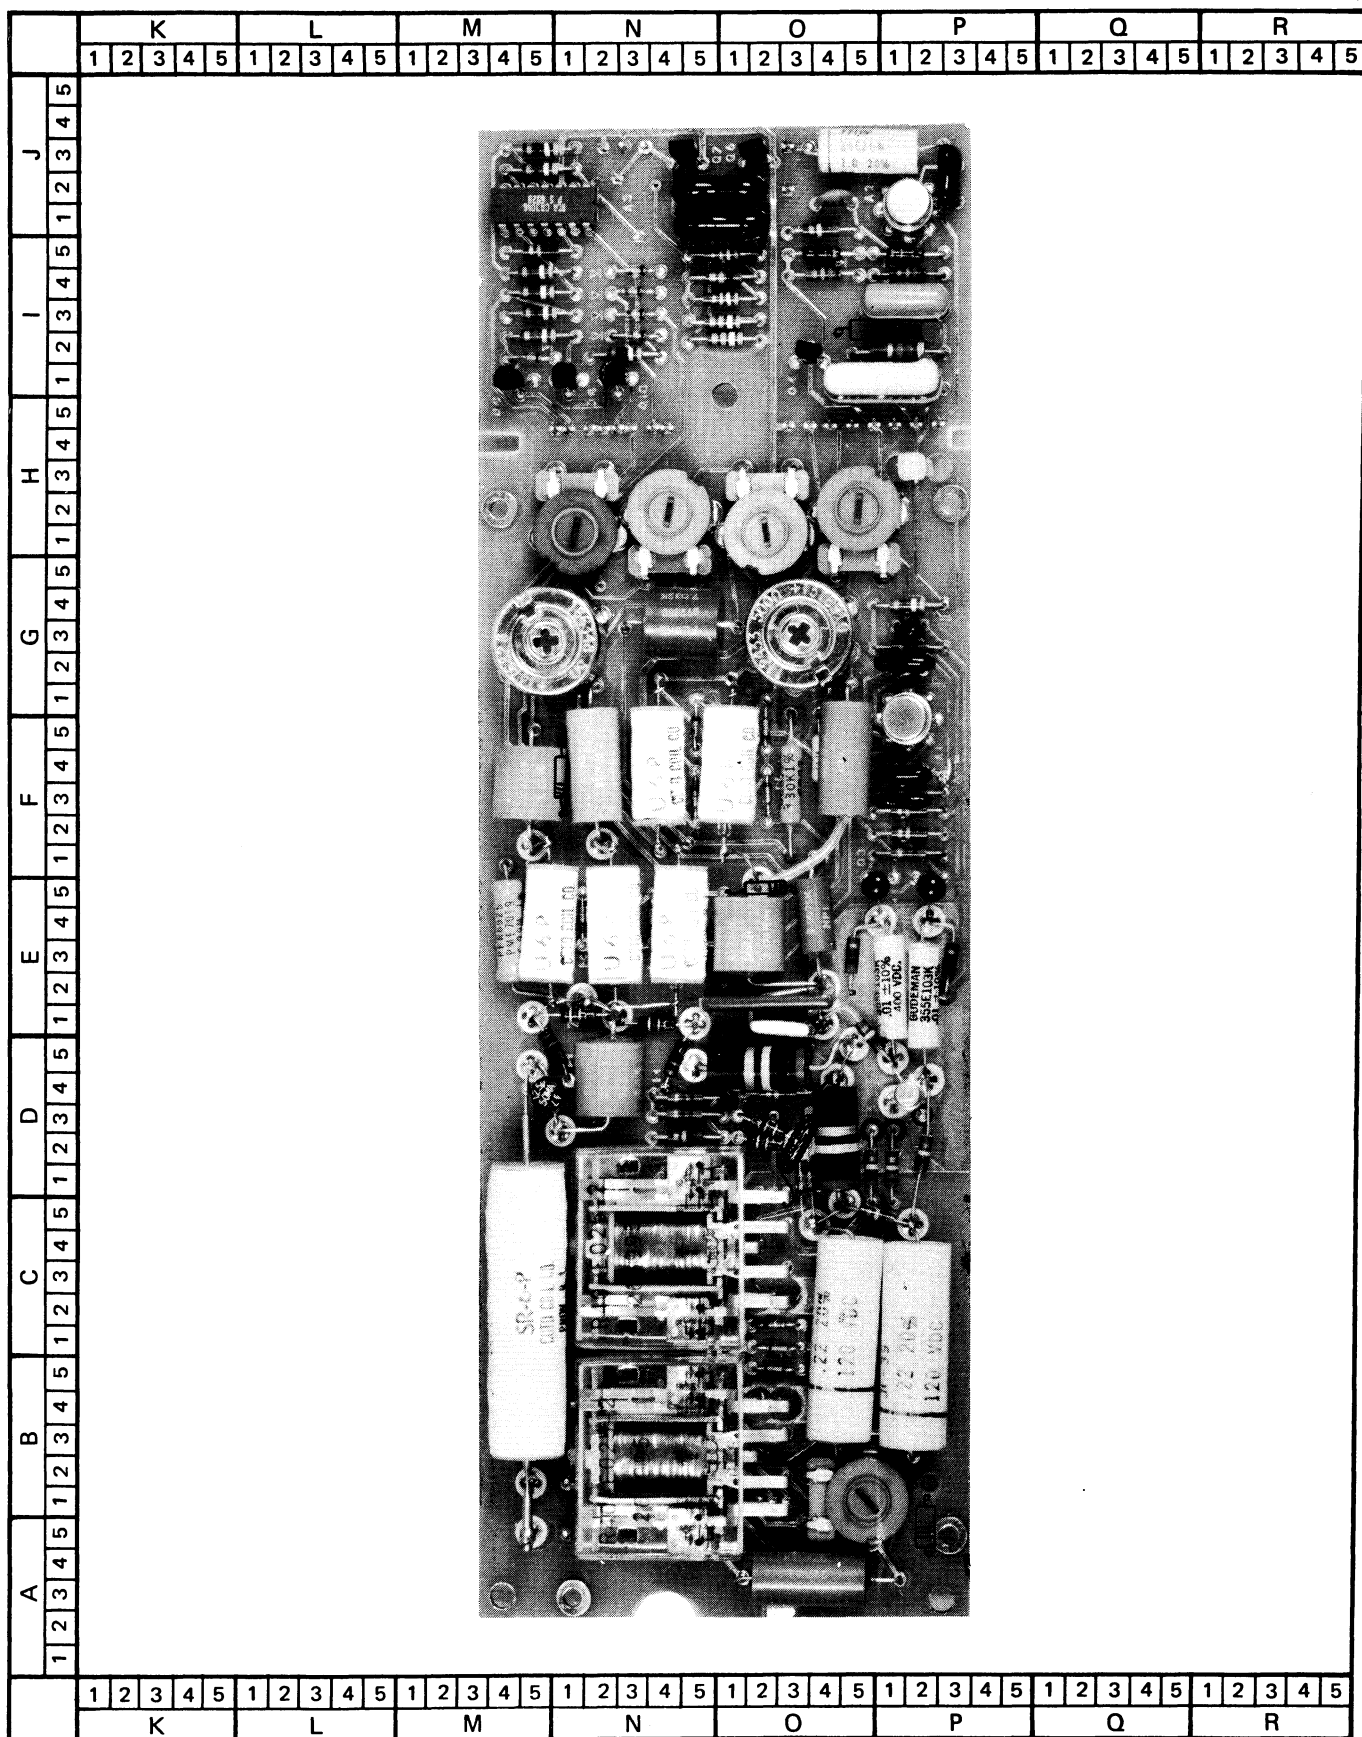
MILLIVOLT/OHMS CONVERTER P/C ASSEMBLY
